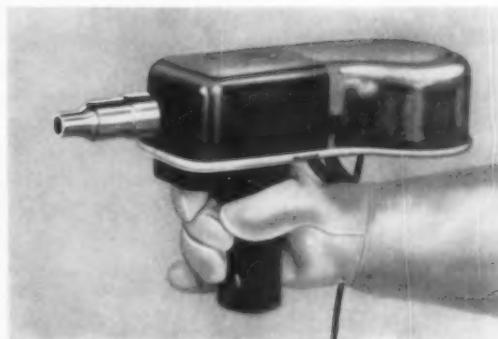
A Streamlined, Hand-Held, Semiautomatic Welding Gun. Shielding gas and electrode wire are fed simultaneously from the nozzle. Drive rolls and wire supply are contained in the gun. The loaded gun weighs about 4 lb. (Courtesy Air Reduction Sales Co.)
